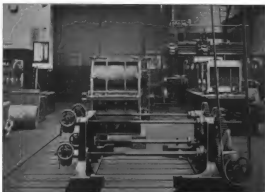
BORING MACHINE FOR PISTON AND VALVE ROD HOLES.
